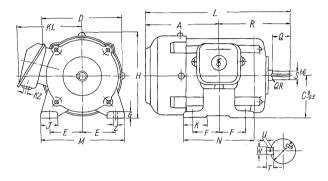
Outline dimensions (Frame No. 61 L~71 L)
